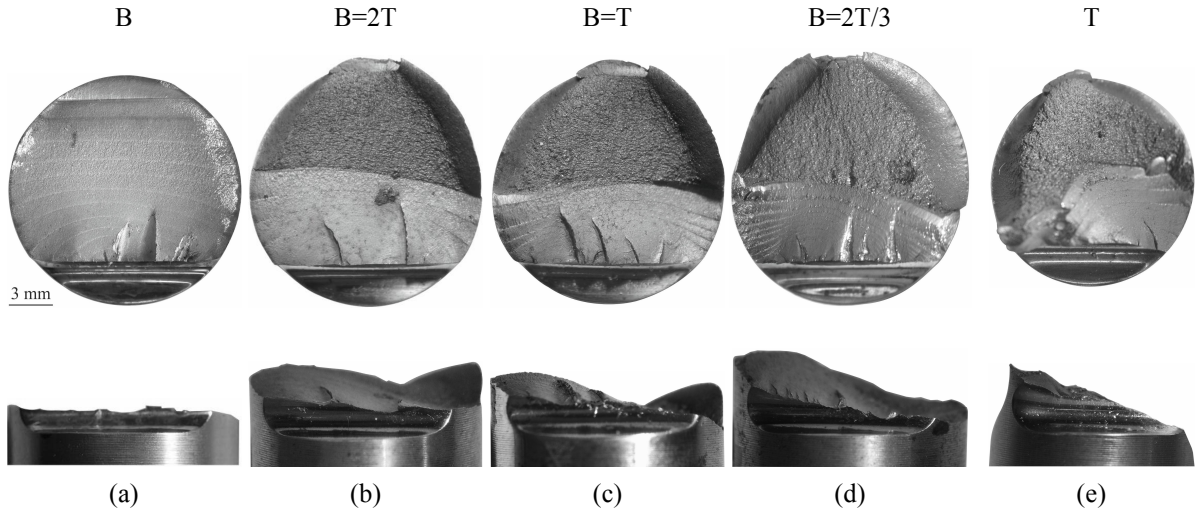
Fracture surfaces of fatigue crack front marking tests for the different loading patterns: a) B; b) B=2T; c) B=T; d) B=2T/3; e) T
